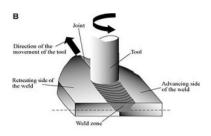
Schematic of the friction stir welding process. 1.1 Principle of operation
